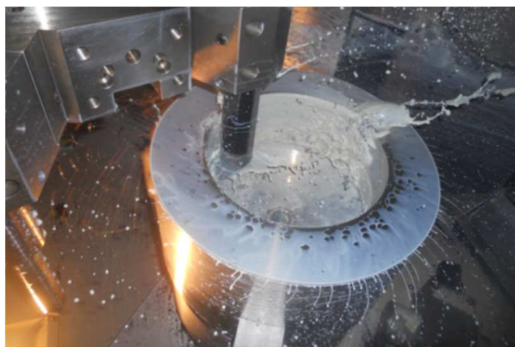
AISI 304 Cutting of hemisphere for R-20 ignition chamber.
